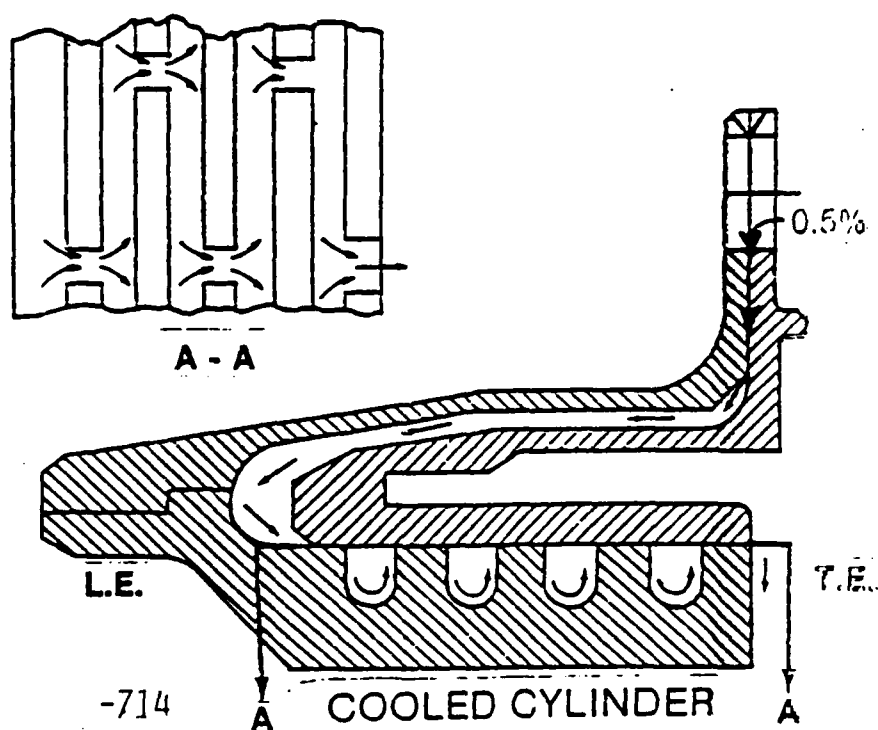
, GAS PRODUCER TURBINE ROTOR AND COOLED CYLINDER ASSEMBLY
